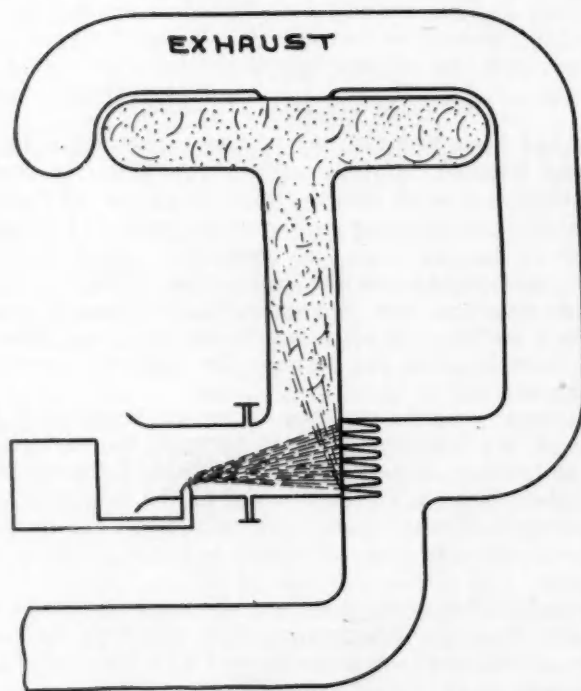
IN THIS MANIFOLD THE AIR AND FUEL CHARGE IS PROJECTED AGAINST A HEATED SURFACE
